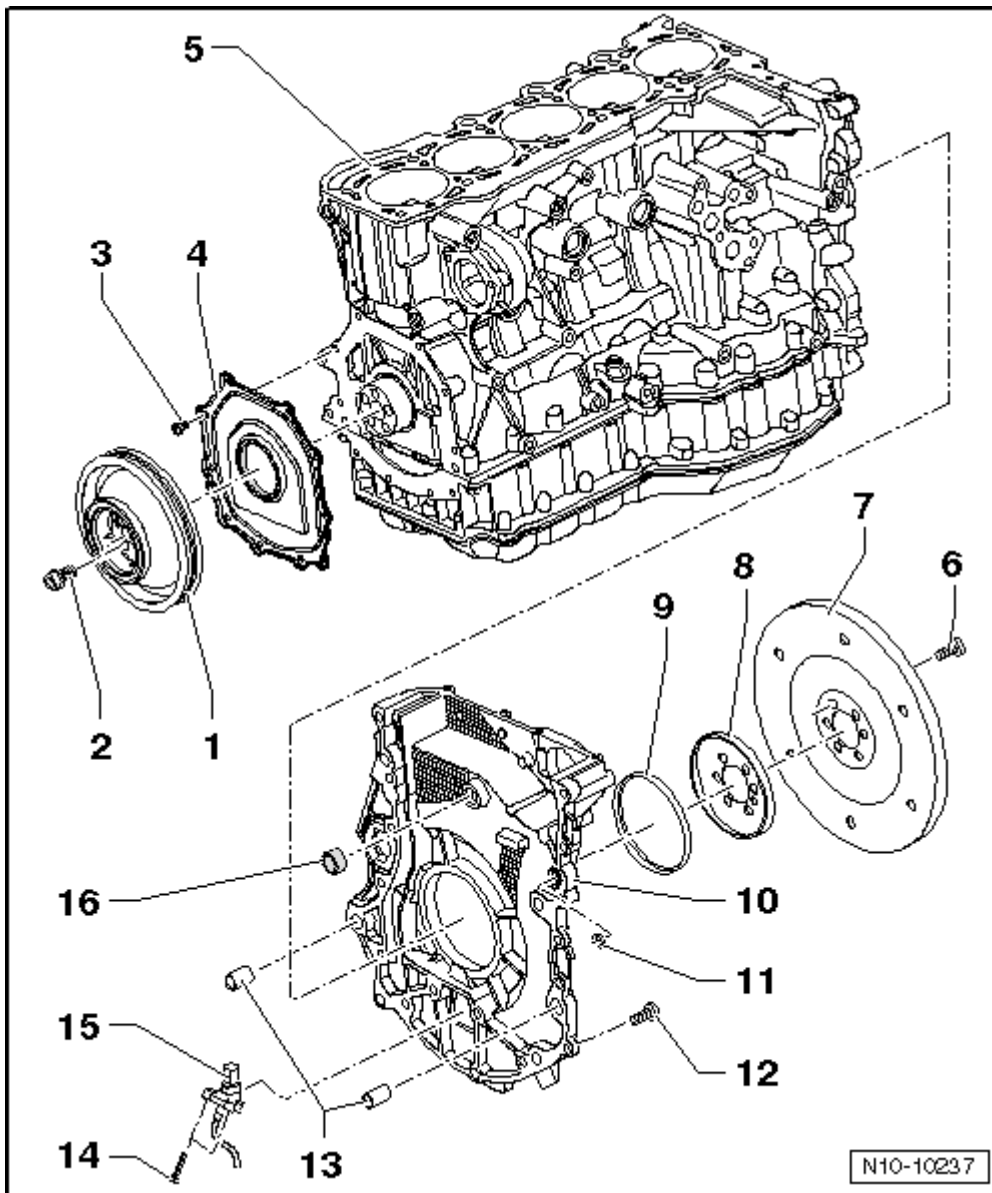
Sealing Flanges And Flywheel/Drive Plate Assembly Overview
